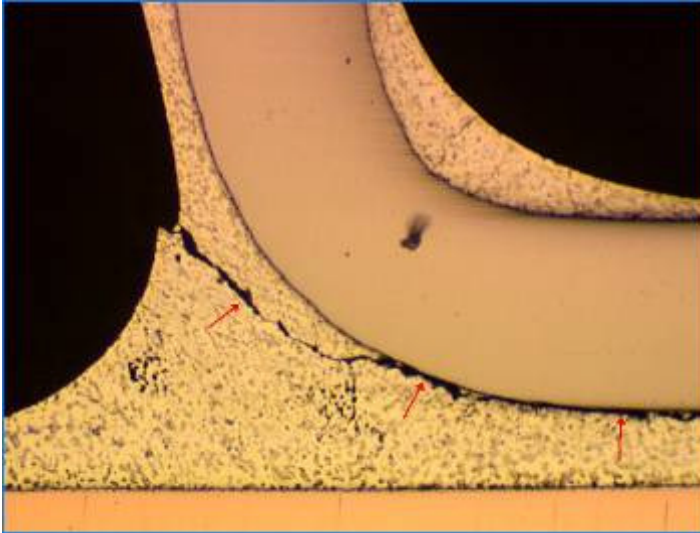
cross section, SN67, U62, right lead solder crack, 200xb
